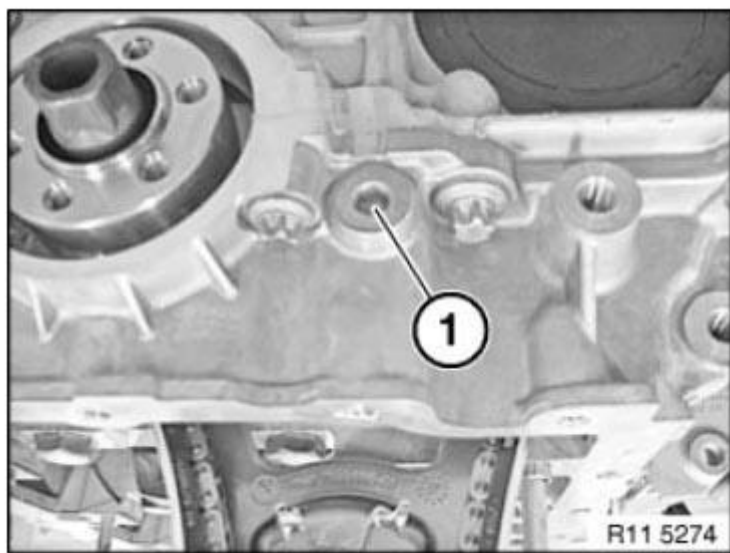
Identifying Screw Plug On Front Of Crankcase
